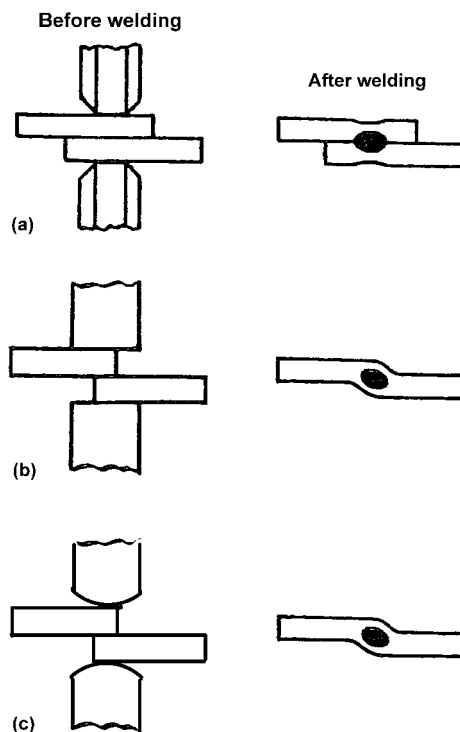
(a) Lap seam weld, (b) mash seam weld with flat electrodes, and (c) mash seam weld with radiused (contoured) electrodes. Flat electrodes in mash seam welding should not be used when sheet thickness is less than 1mm (0.040 in.). Radiused electrodes can be used for sheet thicker than 1mm with the electrode radius of curvature about 100 times the sheet thickness.
